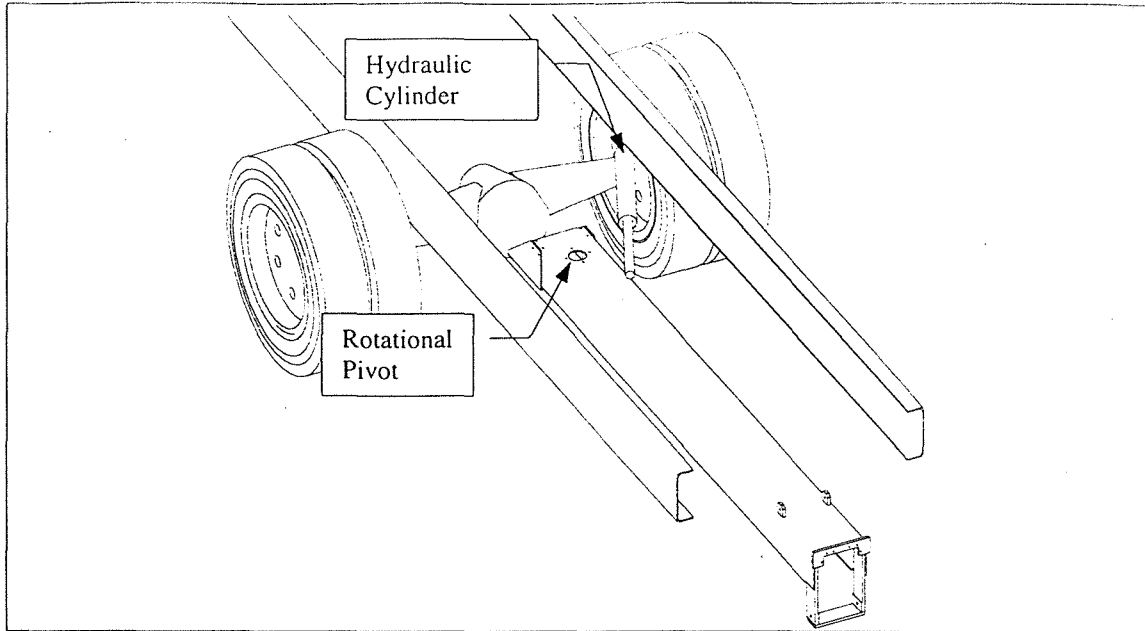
Hydraulic Cylinder Rotational Actuator
